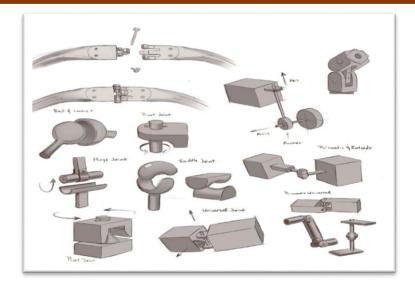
Mechanical Parts - Hinges & Joints.
